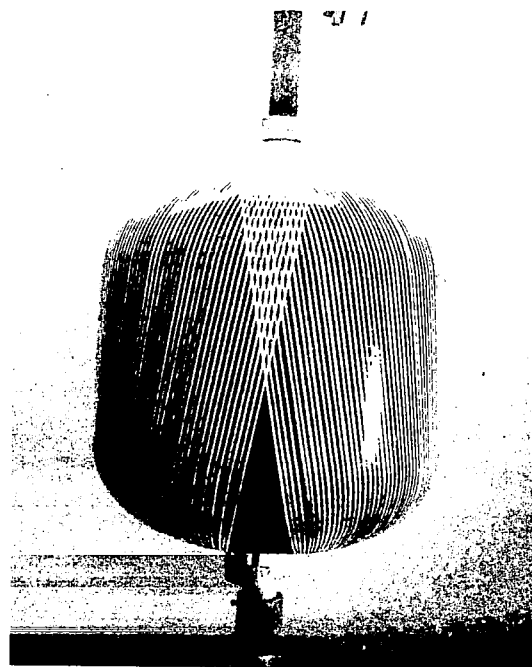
Rear View after Mandrel Has Rotated 180 deg
